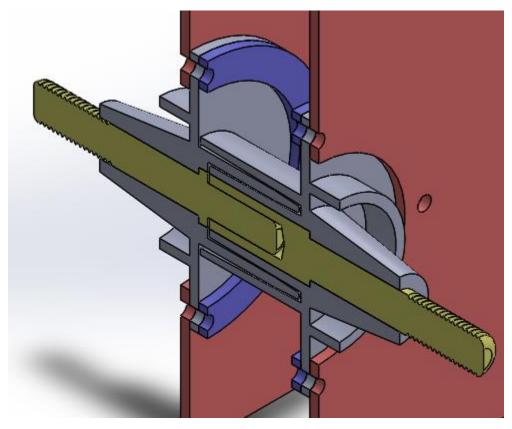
Isometric section view of a mated concept connector mounted on chassis
